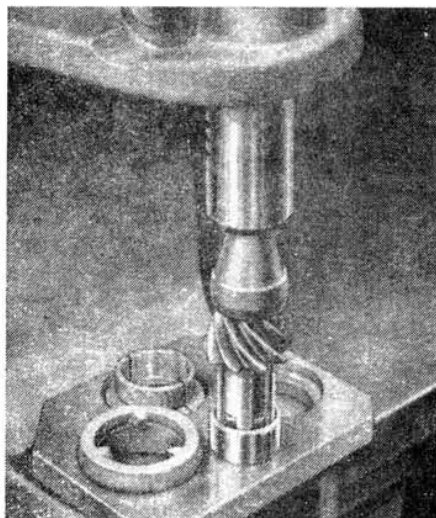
/1 - Pressing-on Bevel Pinion Bearing Using MP 3-104 Plate and Thrust Head (of Škoda 100 cars; if not available, any type of plate and support will do)
